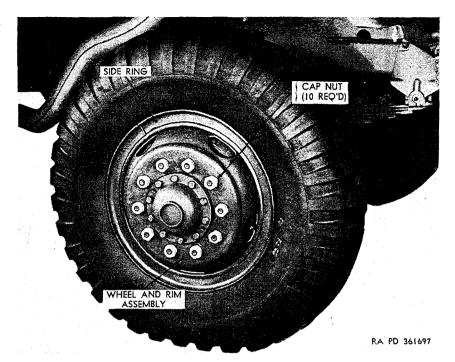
Wheel and tire assembly with snap-on-type side ring (11:00 X 20 tires)
